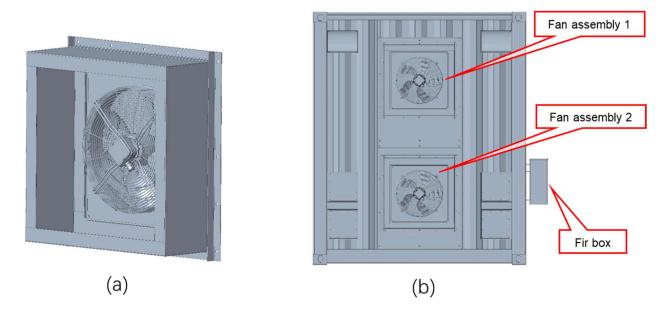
(a) Schematic diagram of fan assembly, (b) Installation diagram of container fans
